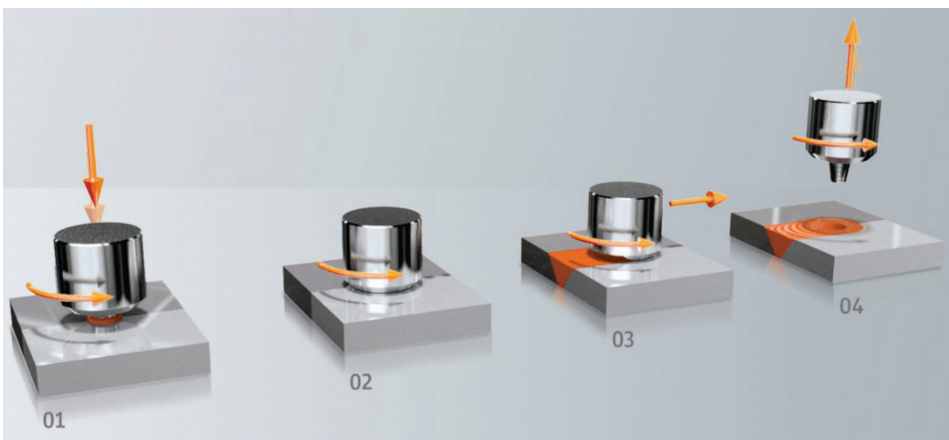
FSW process steps: (1) approach and plunge; (2) dwell for heating; (3) welding; (4) end of welding (Publication V).
